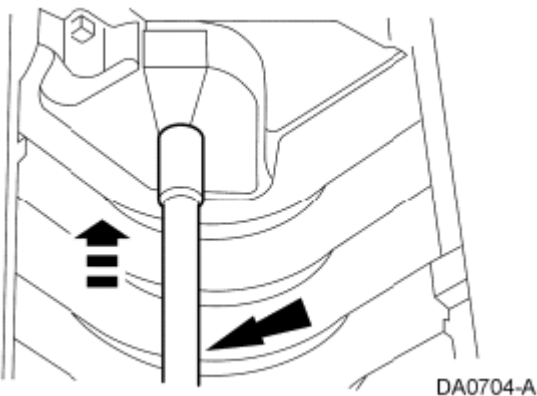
Sliding Coolant Tube Forward With O-ring Seals
